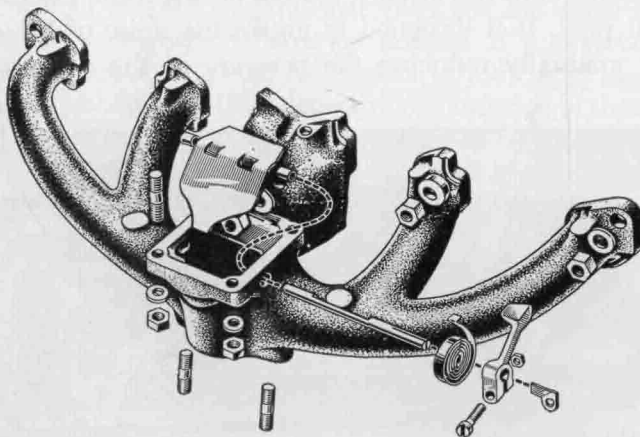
Exhaust manifold for a six-cylinder L-head engine with heat-control valve and parts in disassembled view.
